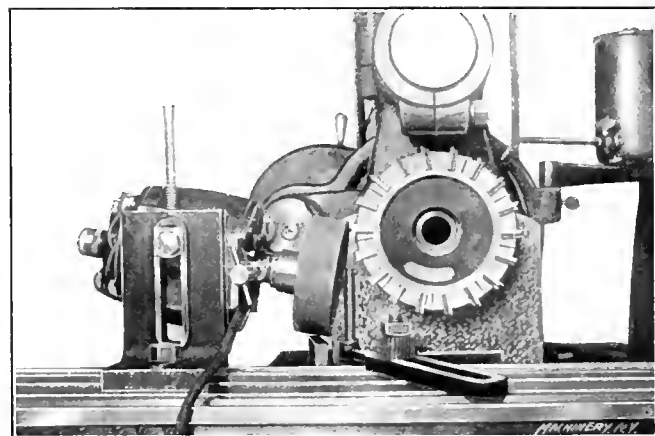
Sharpening the Periphery of a Face Mill, the Blades of which are set at a Slight Angle.
